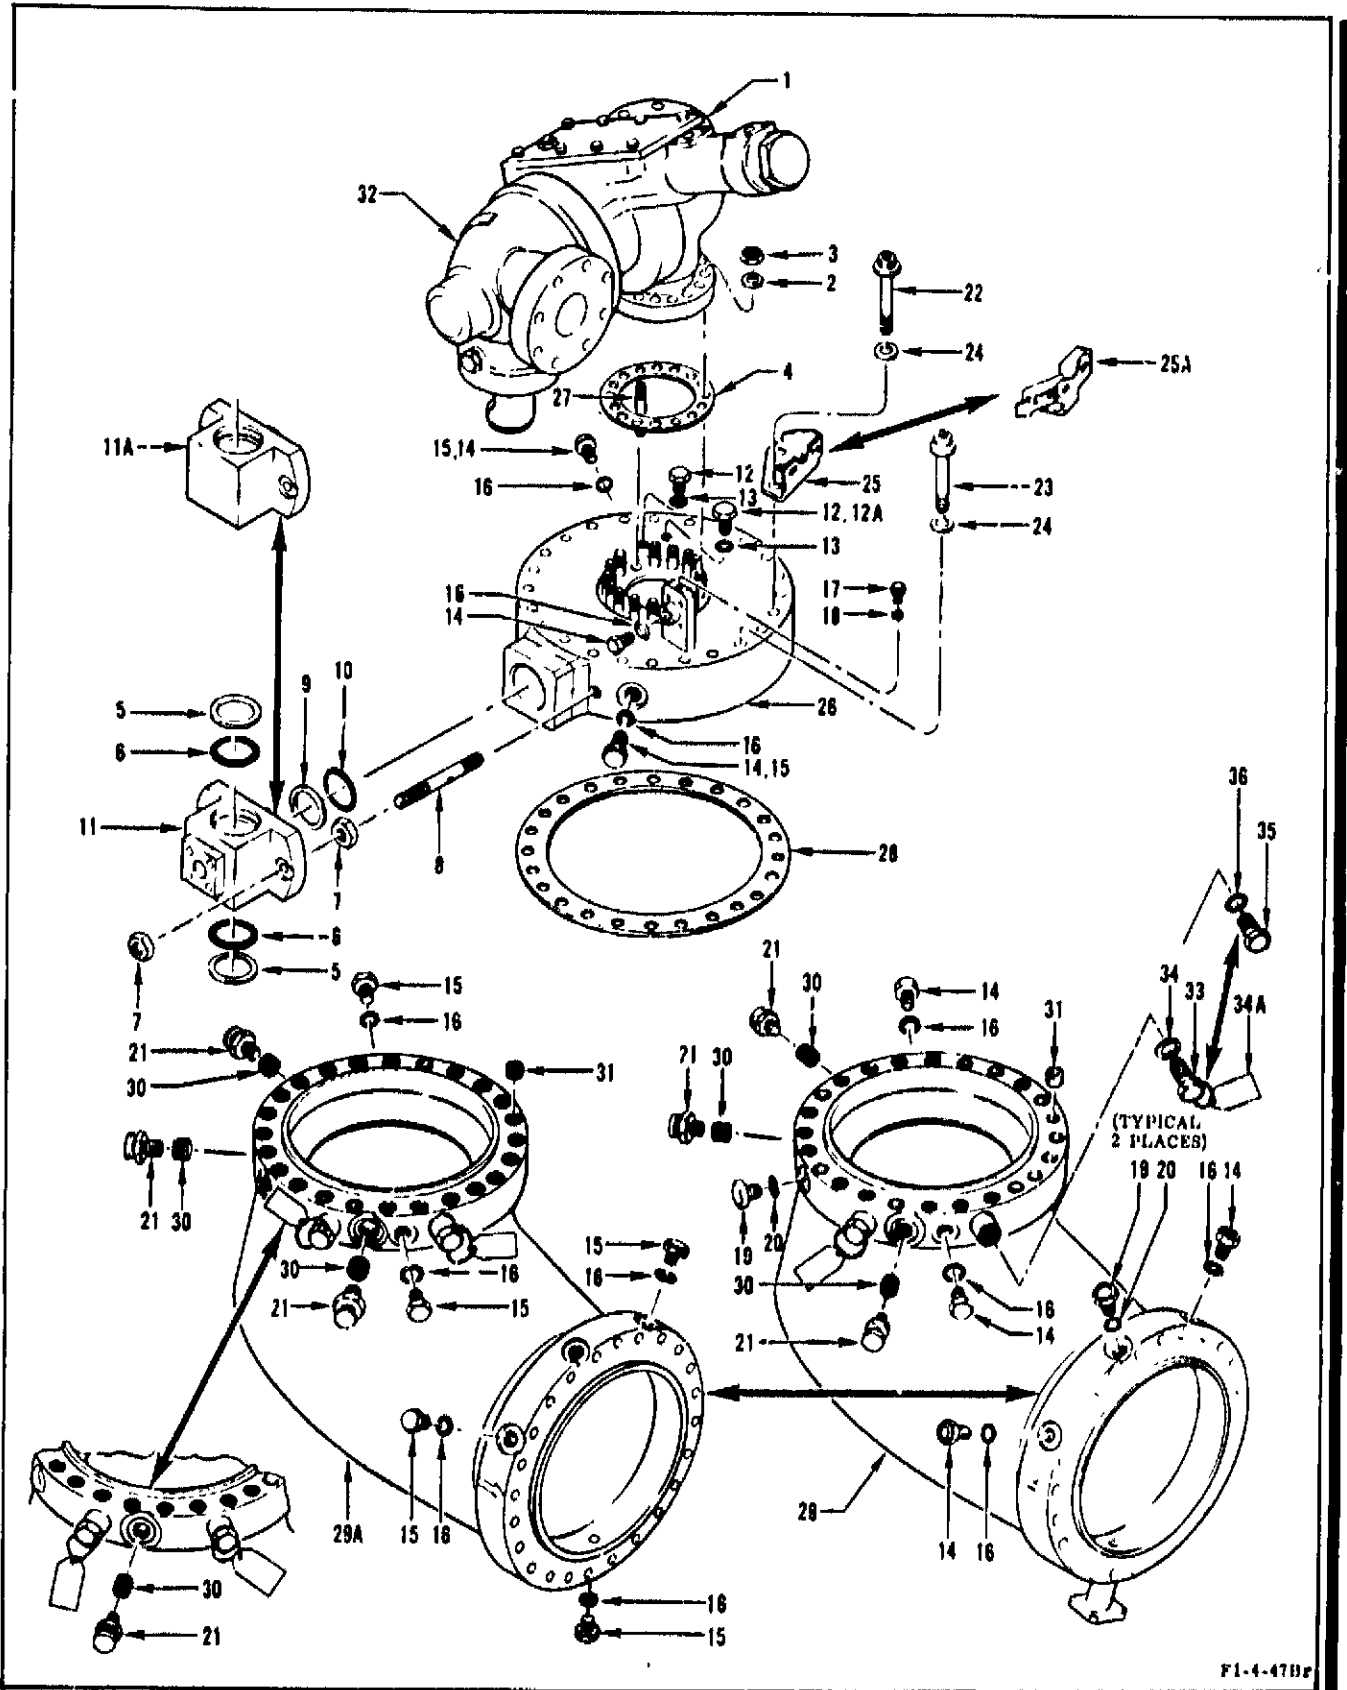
Gas Generator--Exploded View (Sheet 1 of 2)
